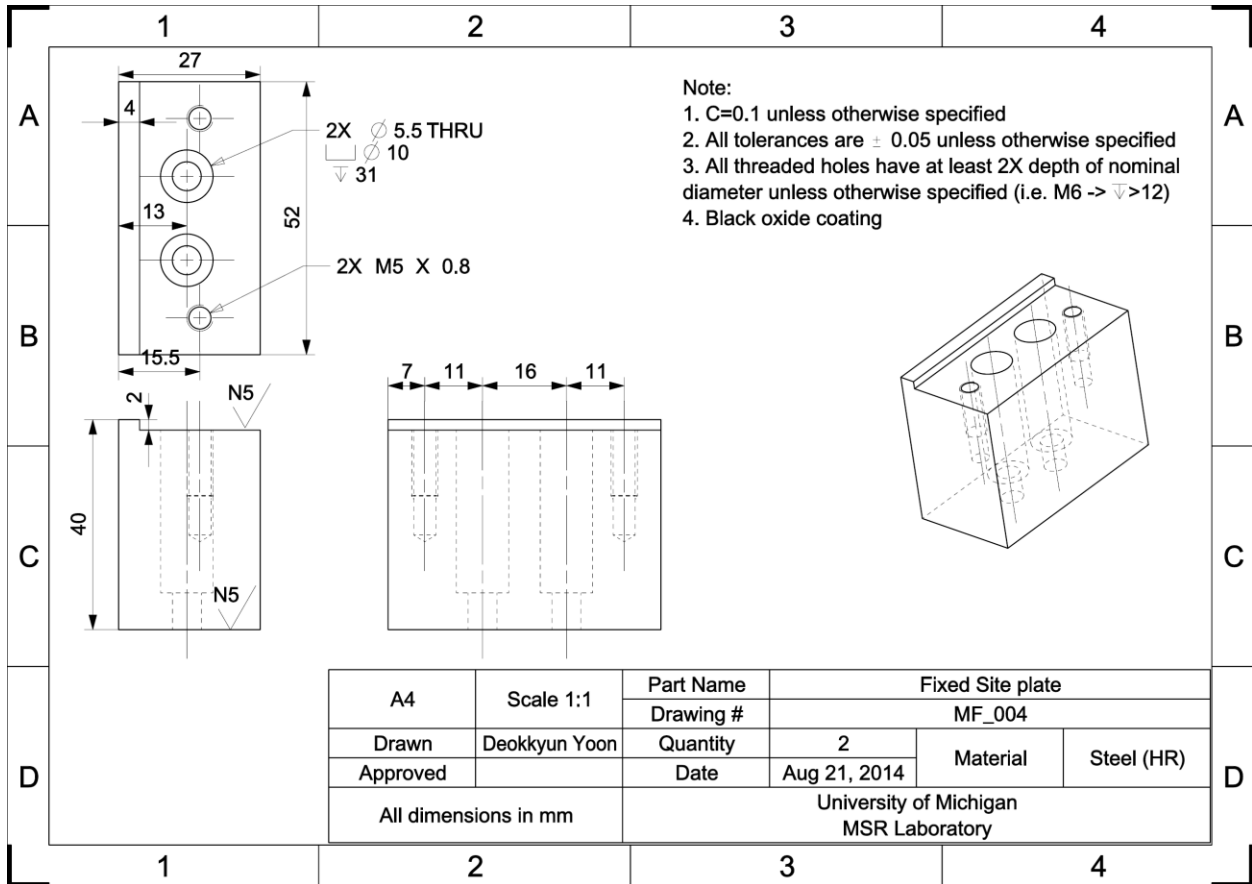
Manufacturing drawing of Fixed Side Plate.
